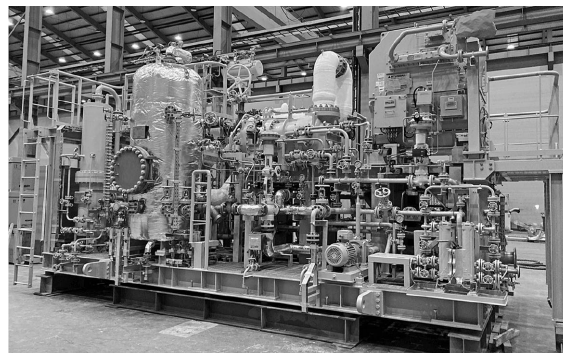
Appearance of oil-flooded screw compressor for X-DF
